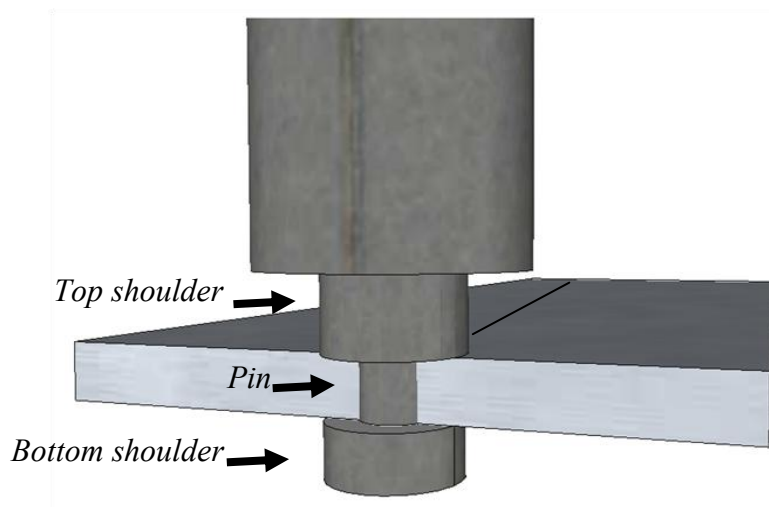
Self-reacting friction stir welding tool. This tool configuration consists of one pin tool and two shoulders, one in the top and one in the bottom of the workpiece.
